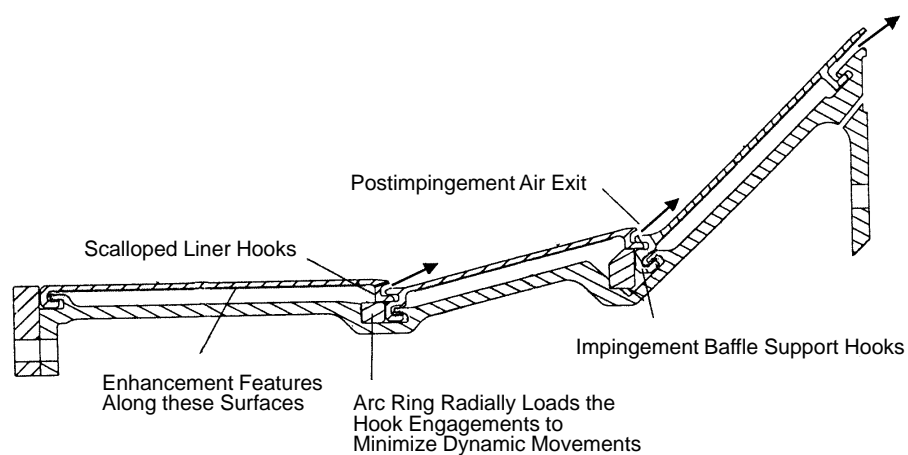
Full-Scale MRA Sector Inner Flowpath Liner Assembly
